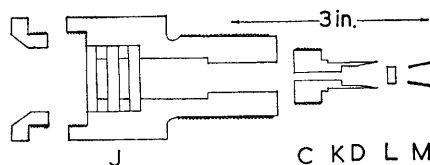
Window support, one of three. J, safety windows separated by rubber rings; C, thread to engage withdrawing tool; K, window position; D, tight-fitting tapered flange; L, window to Poulter's specification; M, nylon retainer.
